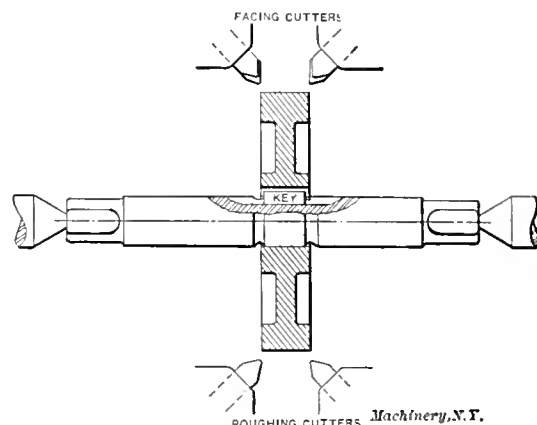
Facing Gear Blanks, mounted in the Lathe on a Keyed Arbor.
